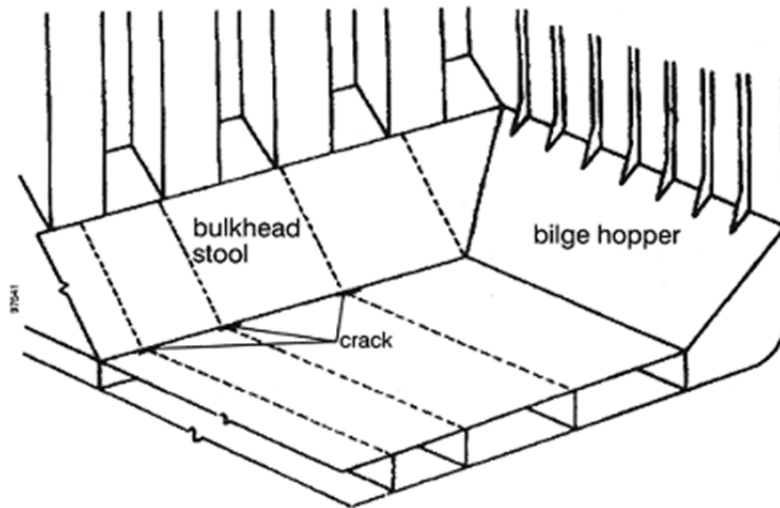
(1) Cracking at the connection of bulkhead stool and tanktop
